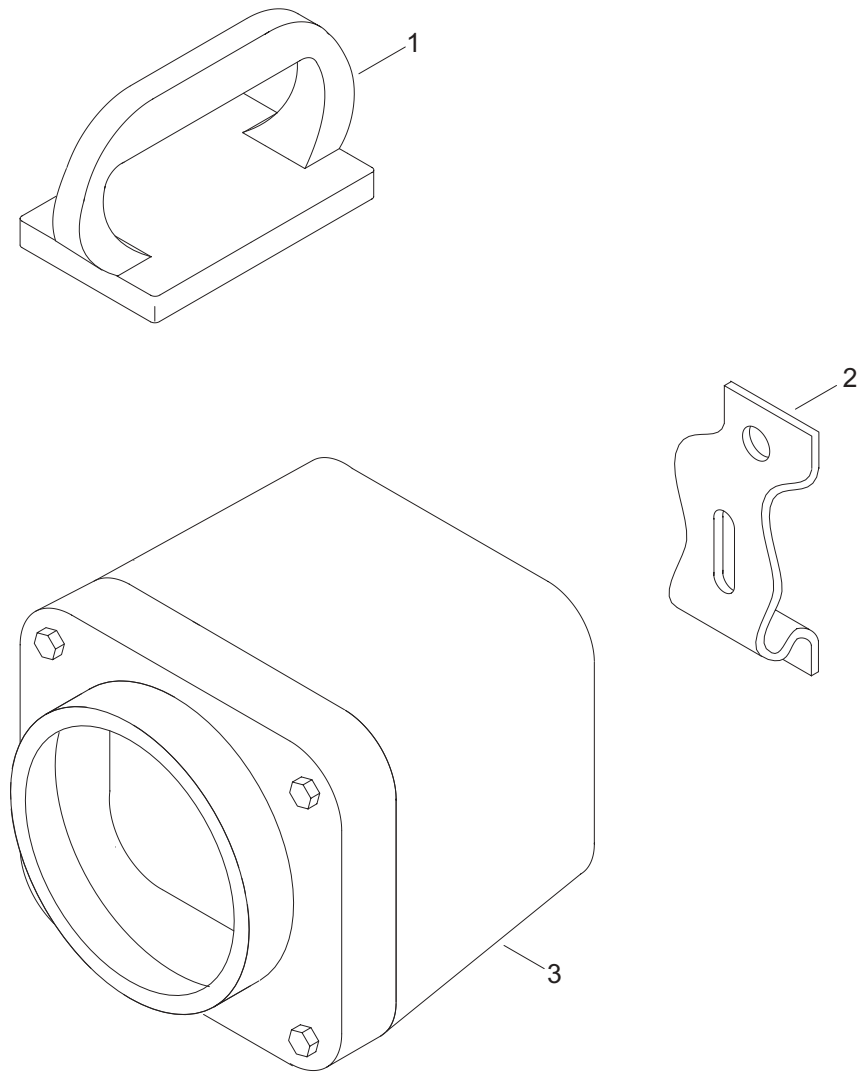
Personnel Shelter Hand Lantern and Mounting Bracket
